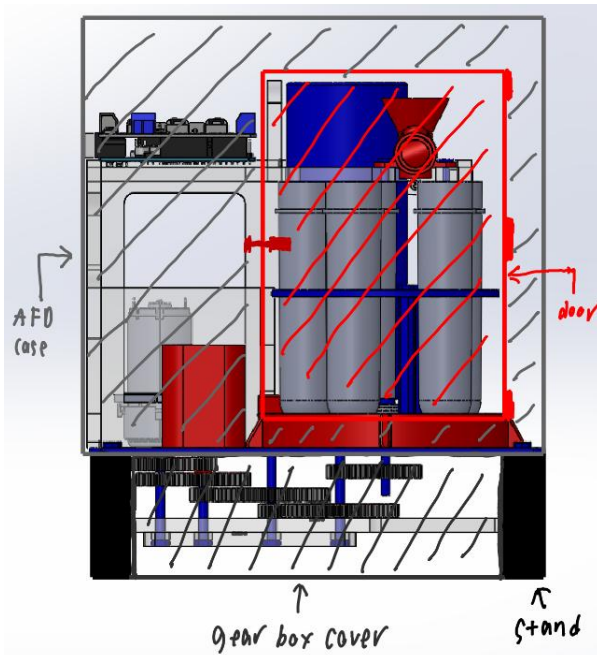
Front view of the final design with the changes that came for testing the prototype.
